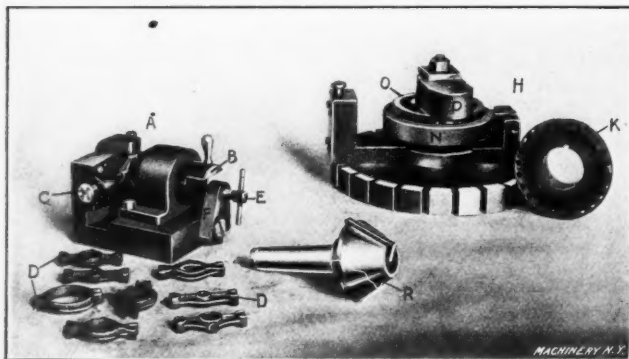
Two Examples of Drill Jigs and a Combination Centering Tool and Cone Center
